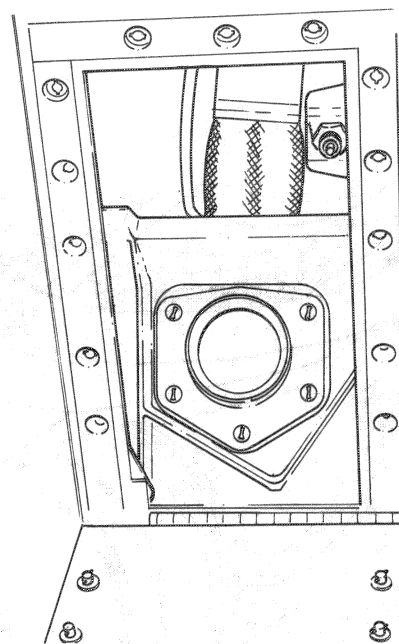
Engine Disconnection (Sheet 3 of 5)
